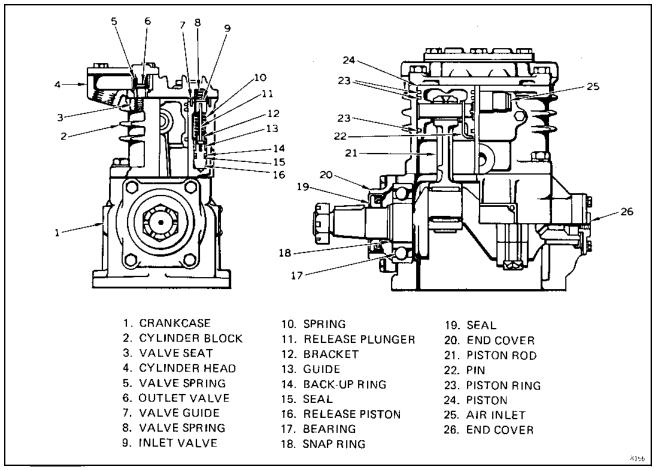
AIR COMPRESSOR, TWO PISTON
